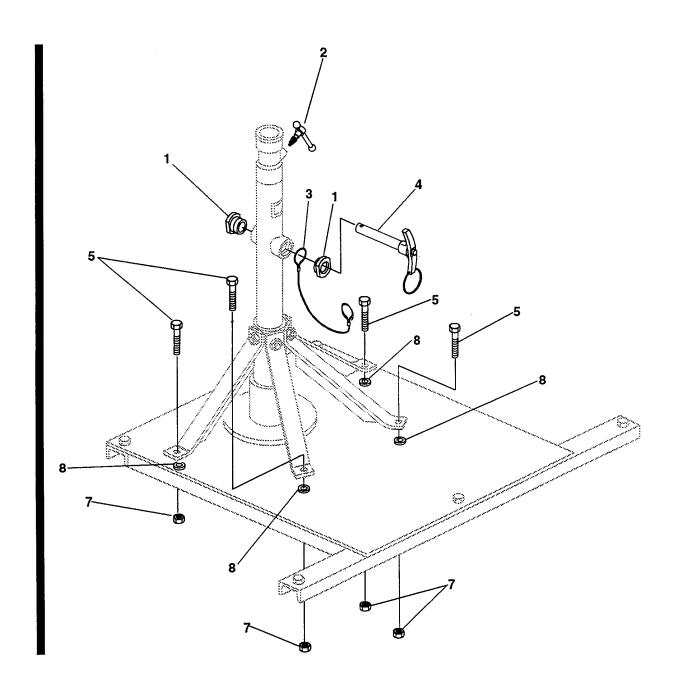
Mount, Pedestal, Machine Gun, M6 12956270 (Assembled View)
